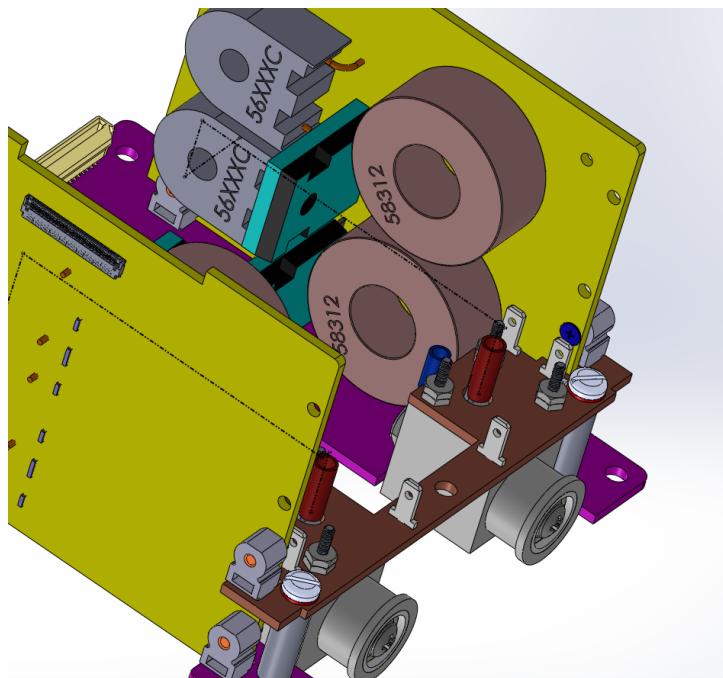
Solder and crimp a 16-22 AWG to Anode Ring Terminal (Red) on Thruster Two. Run this wire to the back of BPR, through the BOTTOM Current Transformer and Solder to the terminal. Solder the Magnetic Coil and Cathode terminal to appropriate terminals (NOT SHOWN.)
